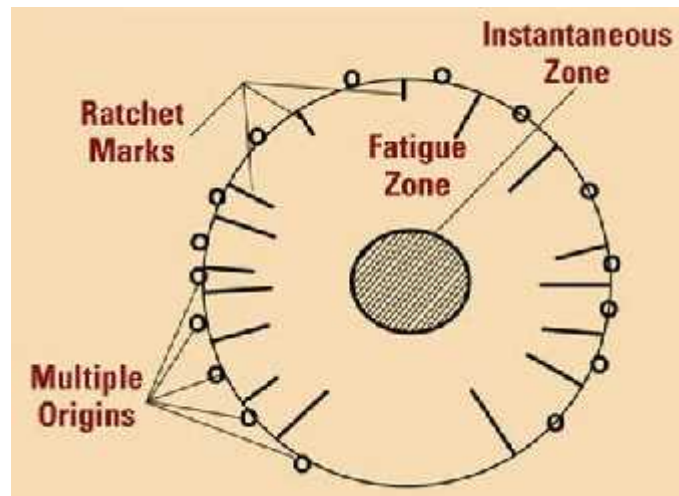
Schematic Diagram of Rotating Bending Failure (with a Lighter Bending Load) of Shafts Showing Multiple Crack Origin [8]
